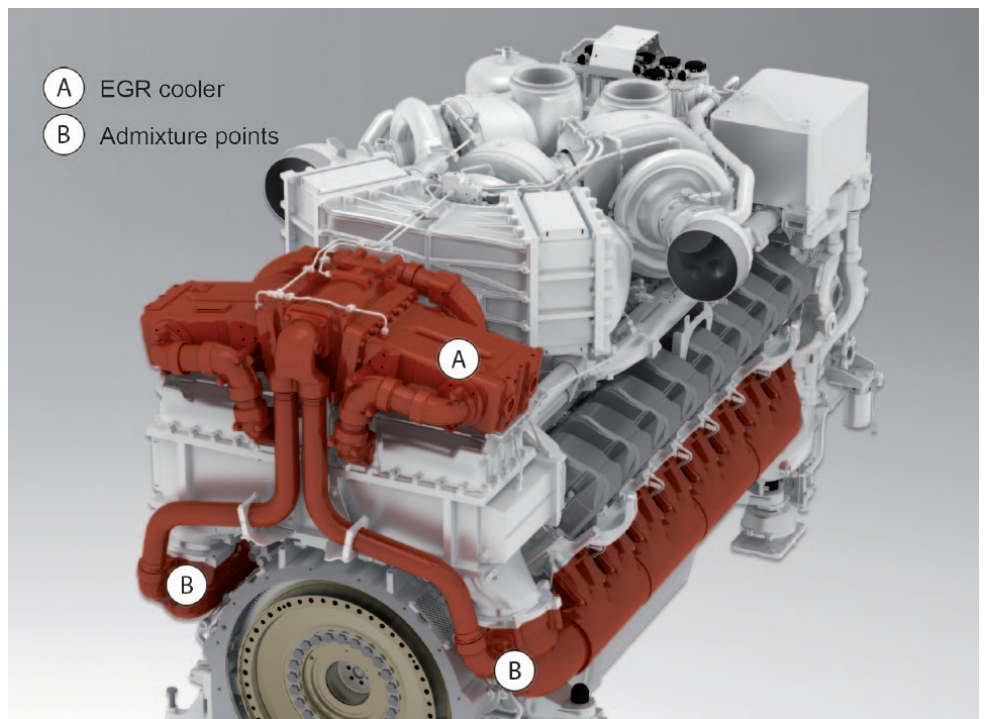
Integration of exhaust gas recirculation in engine design concept
